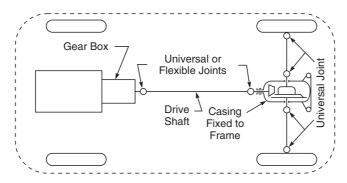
Arrangement of Power Transmission (Front Engine Rear Drive)
